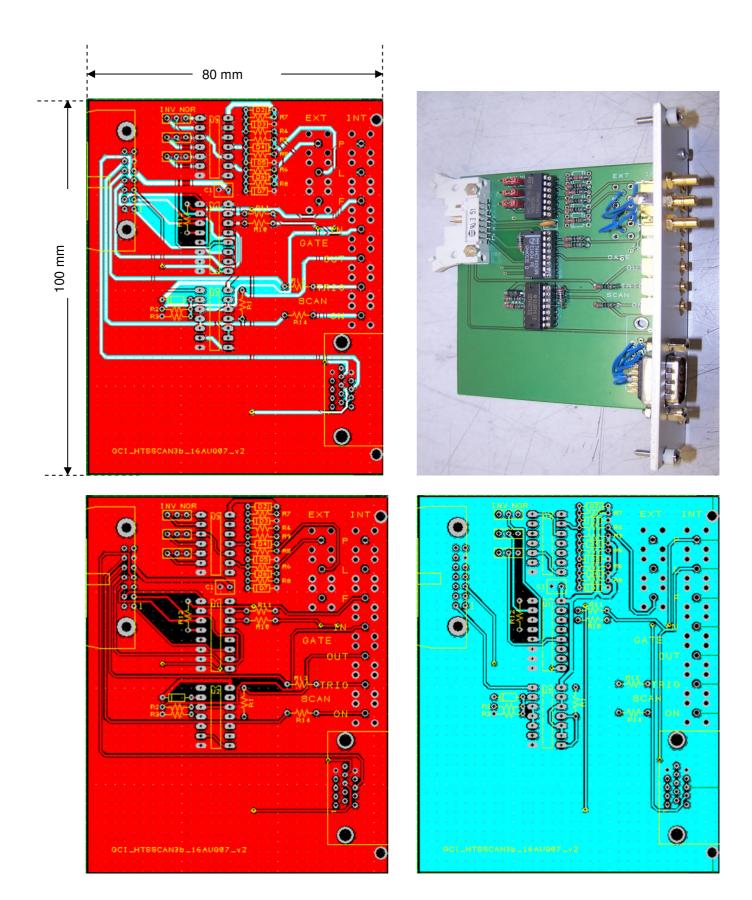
Double-sided printed circuit board layouts of the logic output board.
